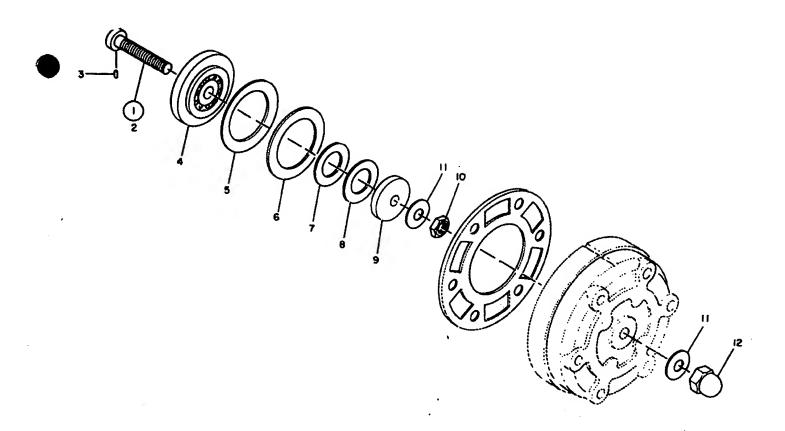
42 GA CONCENTRIC RING VALVE ASSEMBLY
